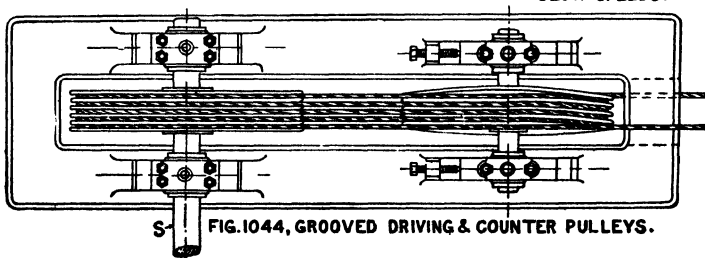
GROOVED DRIVING & COUNTER PULLEYS.
